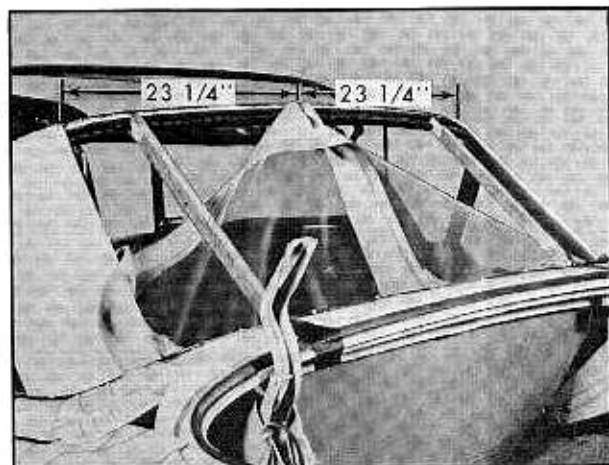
Tacking Quarter Stay Pads to Rear Bow
